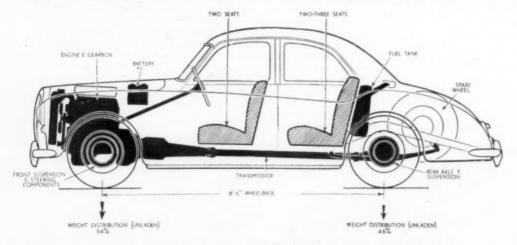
shows a modern design with the engine placed well forward, both front and rear seats being comfortably within the wheelbase.
